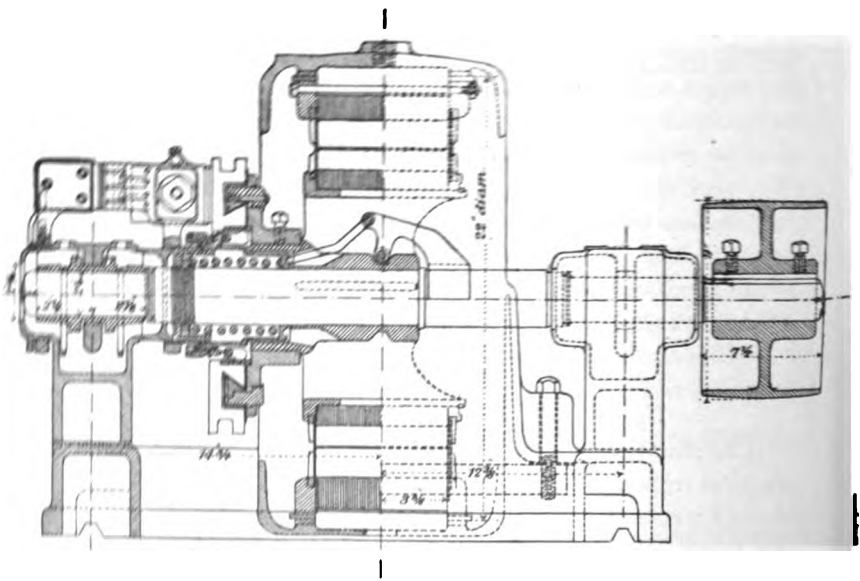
WAGNER MOTOR (LONGITUDINAL SECTION).
